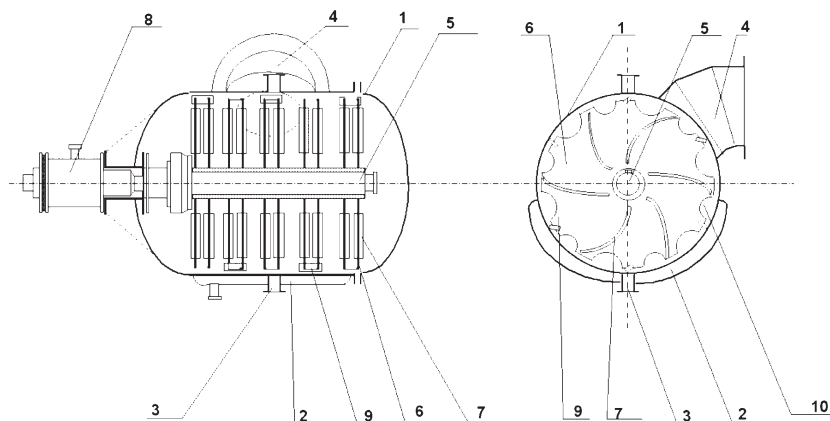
High-vacuum mechanical evaporator with rotating discs: 1—body, 2—heating jacket, 3—residue outlet, 4—vapor outlet, 5—shaft, 6—evaporator disc, 7—scoops, 8—shaft seal, 9—mixing strips, 10—cuts.
